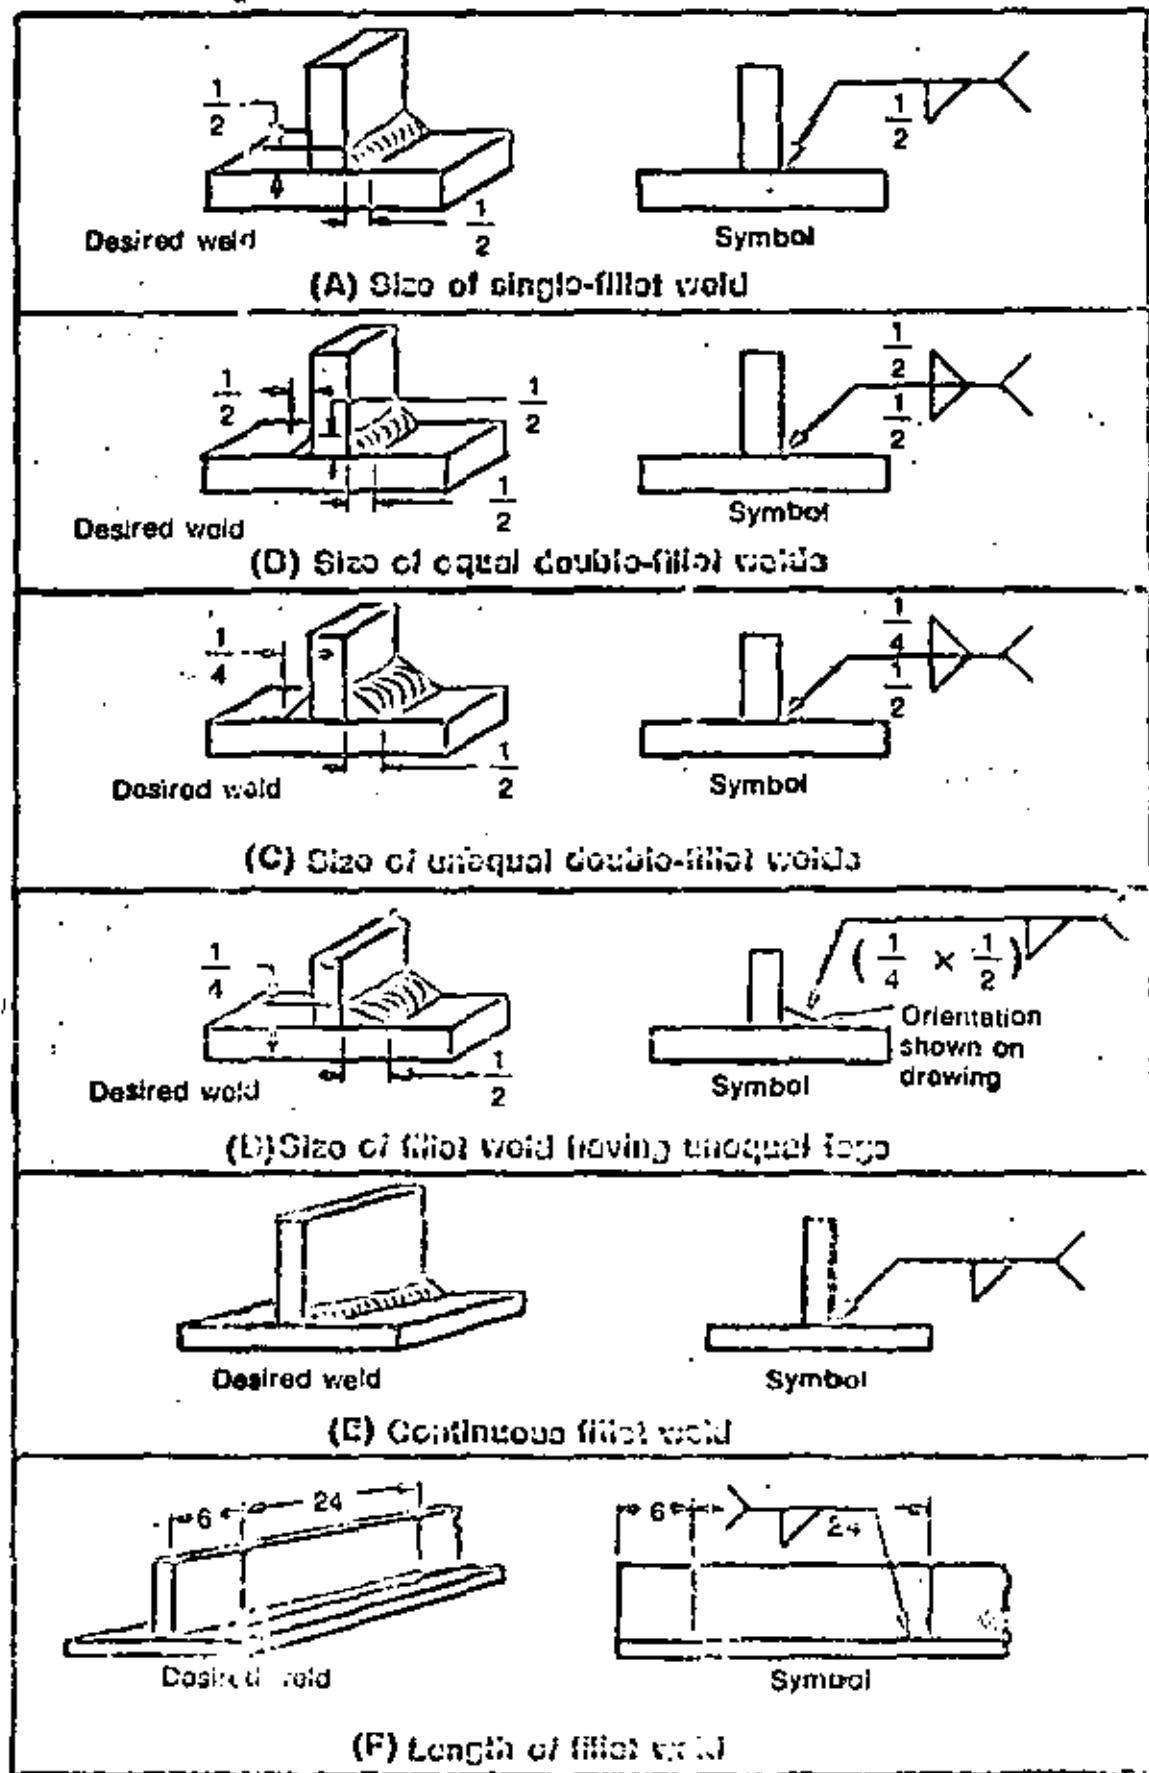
Application of dimensions to fillet weld symbols.
